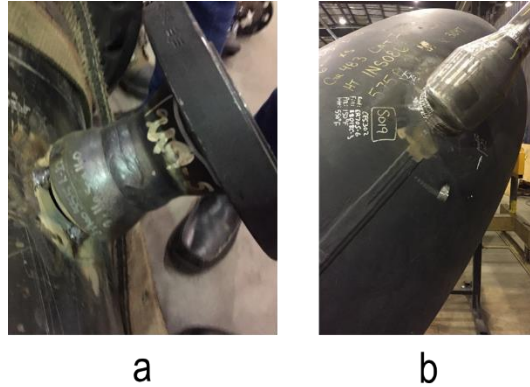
Tack weld vs. roll weld. (a) The fitter tack welds the flange to stabilize its location, orientation and angel. (b) A complete roll weld done by the welder.
